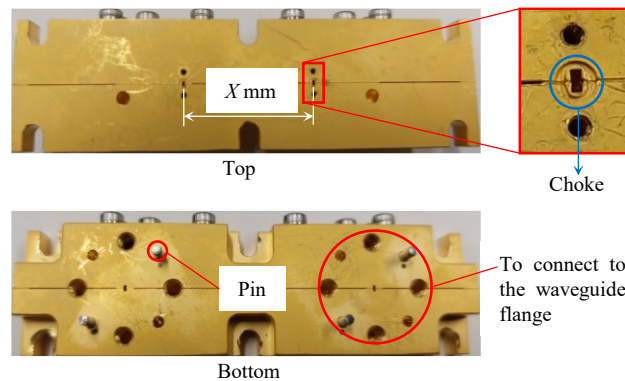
Fabricated jig and an enlarged view of the jig.
